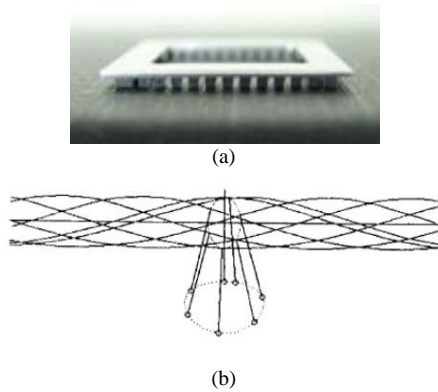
Design and motion of the comb-tooth: (a) Photograph of the comb-tooth, (b) motion of a comb-tooth.
